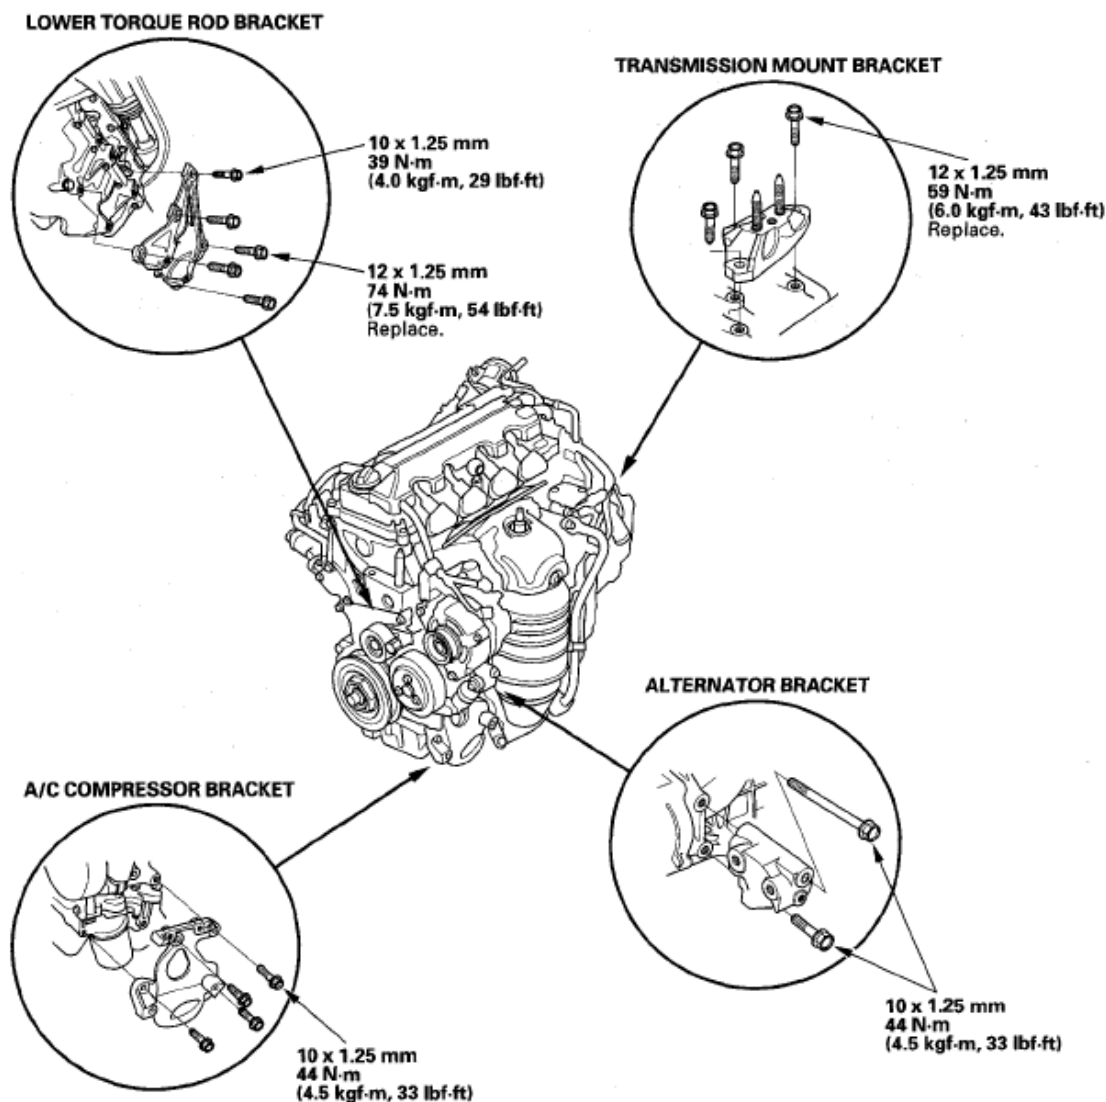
Identifying Engine Brackets (With Torque Specifications)
